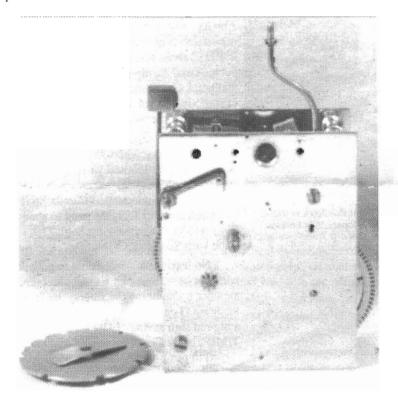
Rear plate of example with count wheel/locking plate removed; pinion of report in place.
